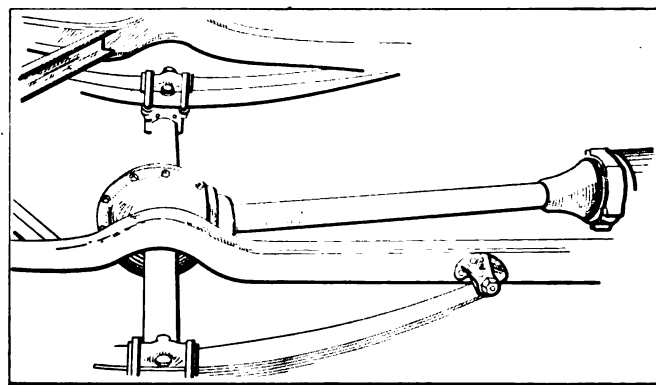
Torque taken up in spring shackles and on tubular covering of driving shaft
